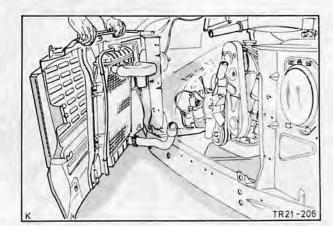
Install radiator grille panel with radiator '(only necessary with 'B' engine)
